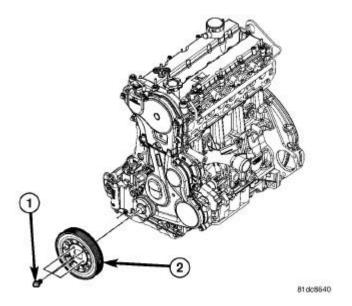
Crankshaft Damper Courtesy of CHRYSLER LLC
